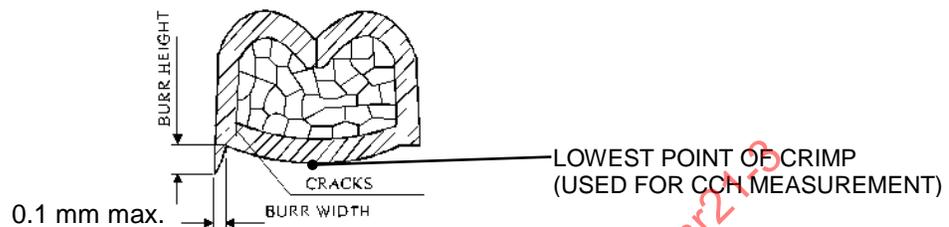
CONDUCTOR CRIMP BURR DETAIL
